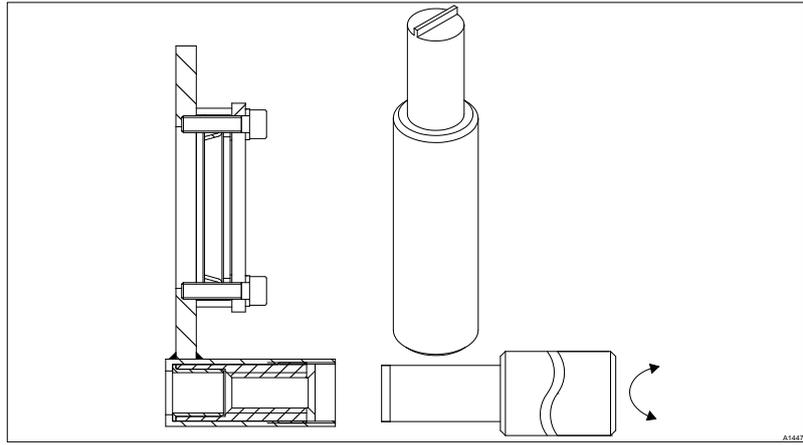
Tool for the threaded sleeve in the wiper mounting, part number 1037738
